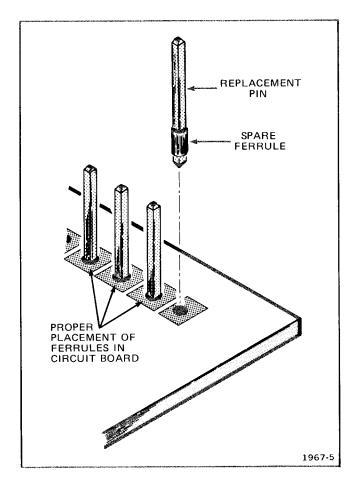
Exploded view of circuit-board pin and ferrule.
